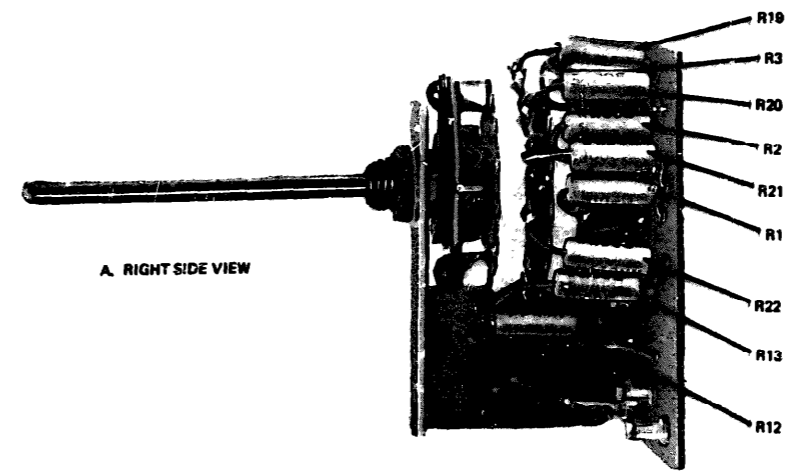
652T if unit carrier insertion switch assembly A7, parts location
